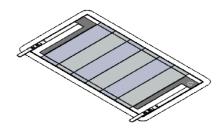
LEH3_50x50_6_10 module drawing and tolerances
